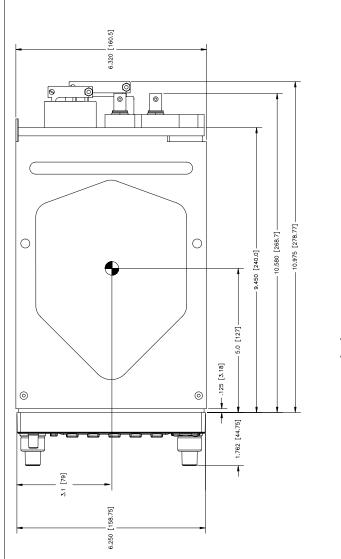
GNS 430 Mounting Rack Dimensions Page F-5 (Page F-6 blank) Rev M
